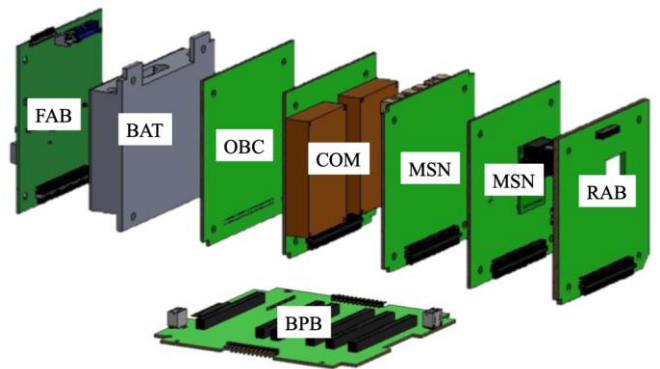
Exploded view of BIRDS-3 CubeSat boards.
